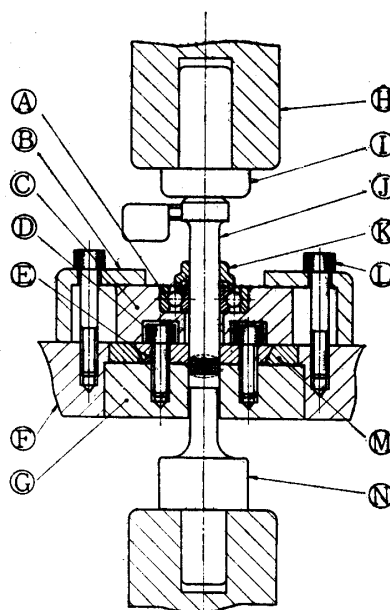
Compression Fixture for Measurement of Slipping Force of a Tablet Surface and Passive Pressure of Lower Punch
